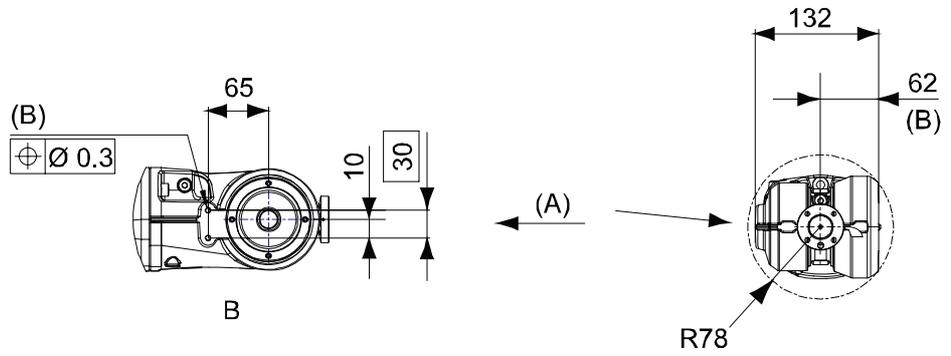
Holes for mounting extra equipment on the wrist, the upper arm housing and on the frame.
